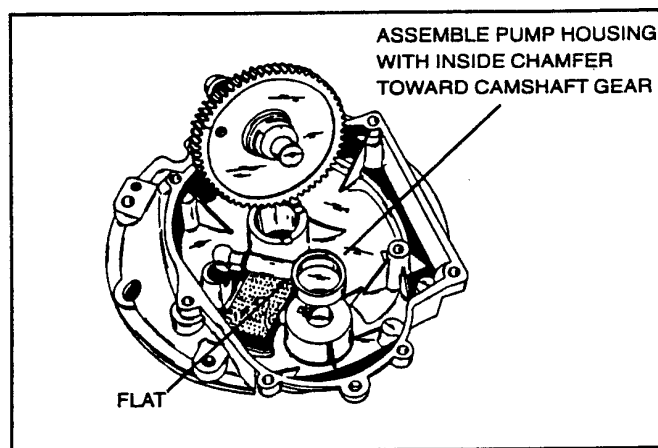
Oil Plunger Used in the Lubrication Mechanism of Small Vertical Shaft Engines [8].
